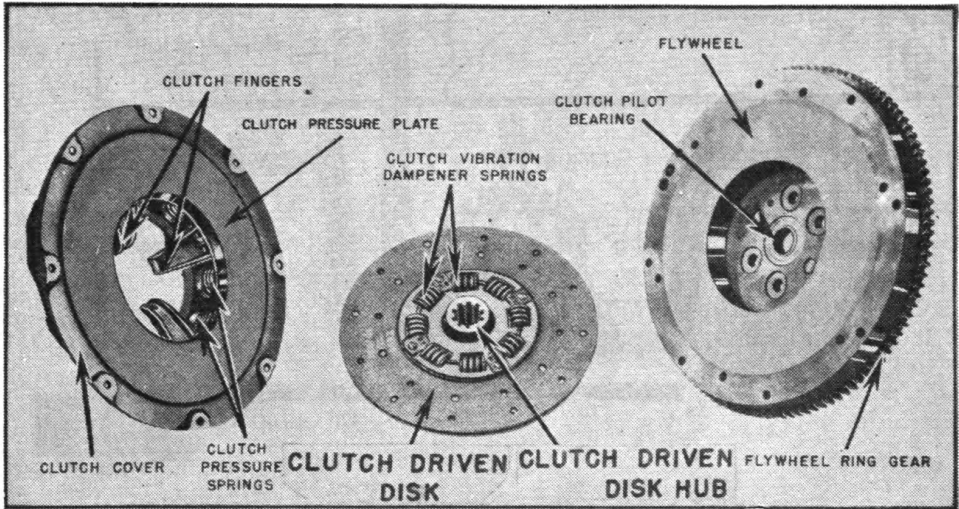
Single plate dry clutch with clutch cover and pressure plate assembly; clutch driven disk (plate); and flywheel.
